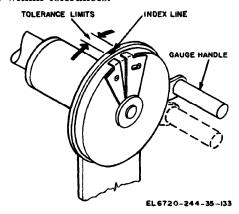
Takeup spool friction tolerance indications.
